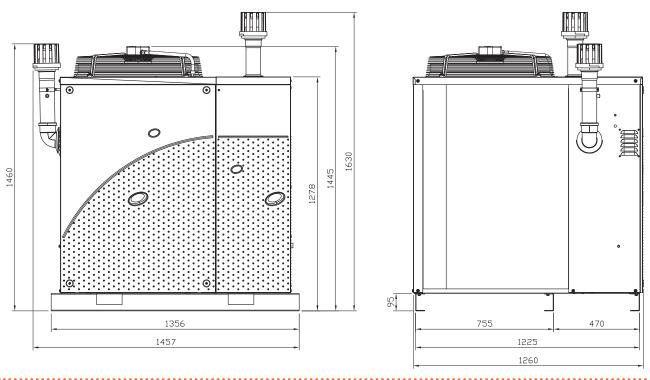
Dimensions (S1 Silenced ventilation) - Front and side view (dimensions in mm)
